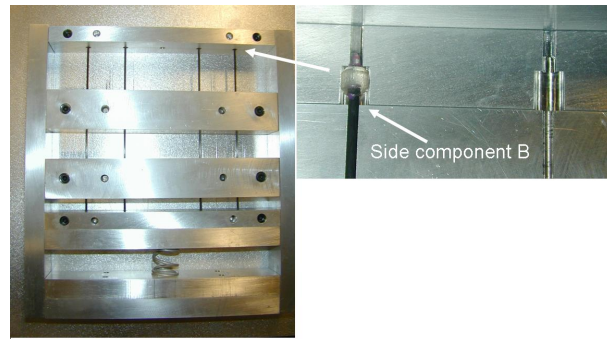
Fixture 2 connects the carbon fiber with the B type joints.
